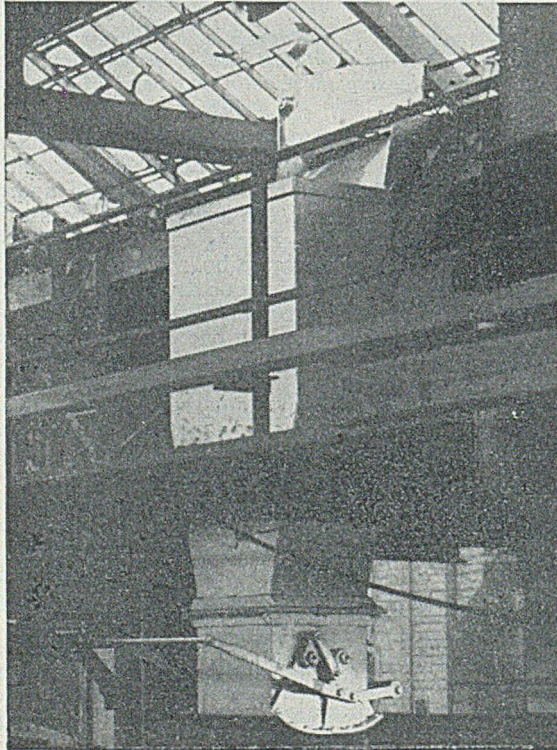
Sand Feed from the Transverse Belt to one of the Overhead Hoppers above the Moulding Machines.
